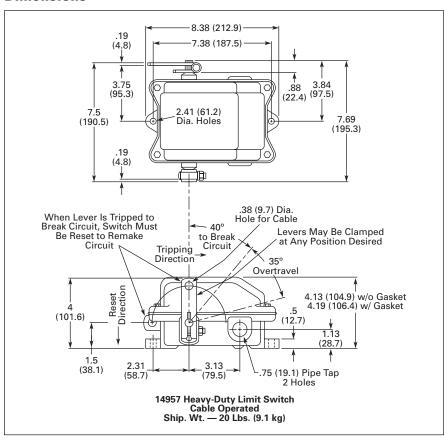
Approximate Dimensions in Inches (mm) and Shipping Weights
